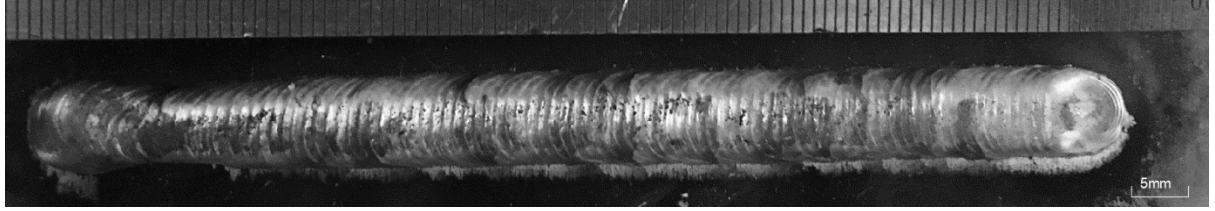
The welding layer with 8.0m/min of feeding wire speed
